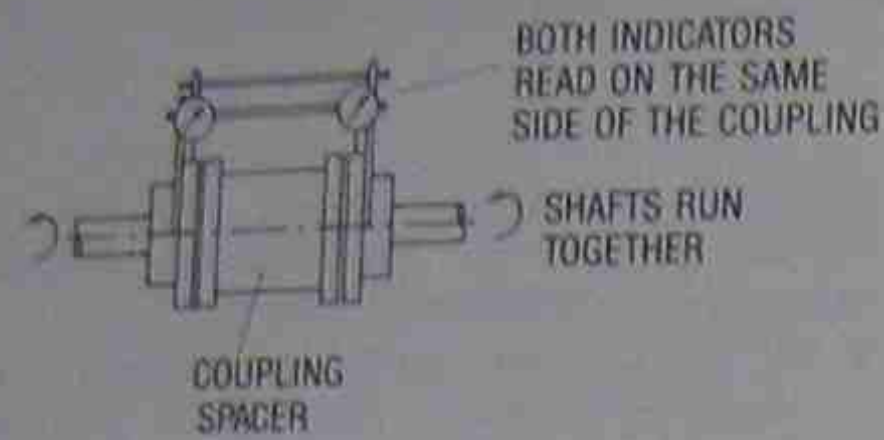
The recommended arrangement for setting up the dial indicators.
